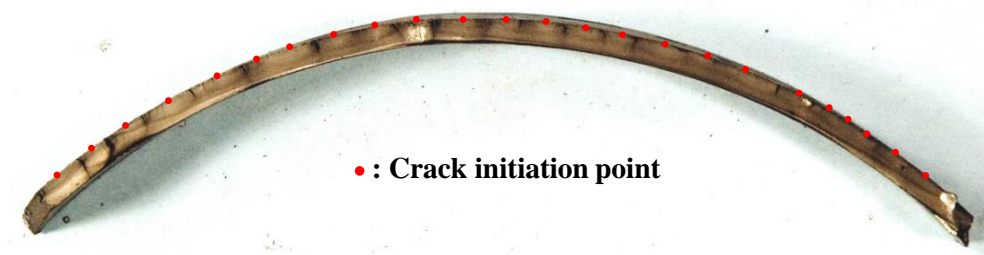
Fatigue fracture surface and identified crack initiation points in Type I-1 Arm
